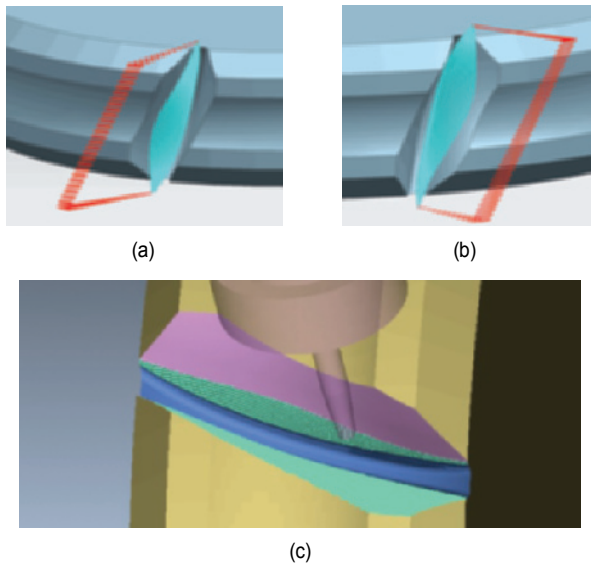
Cutter path and simulation machining of worm wheel flank: (a) Cutter path for left-hand surface; (b) cutter path for right-hand surface; (c) simulation of worm wheel machining.
